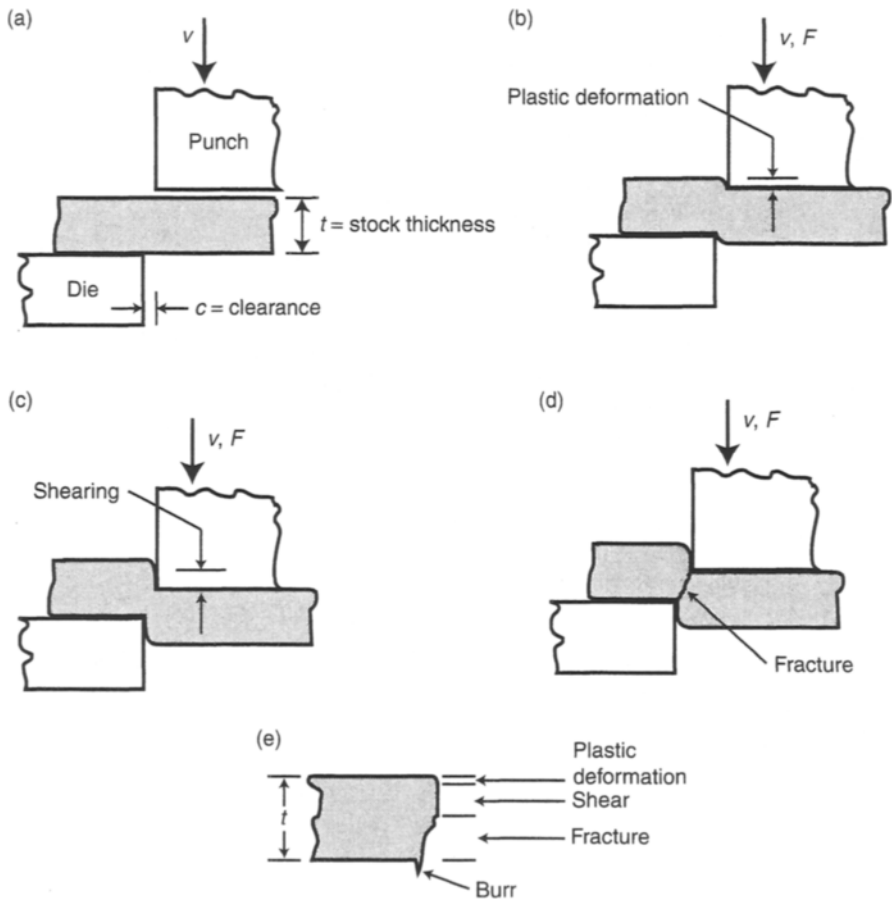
(a) General arrangement of tooling for shearing, (b) initial cutting occurring by plastic deformation, (c) shearing during punch penetration, (d) fracture following shearing, and (e) morphology of sheared cut.
